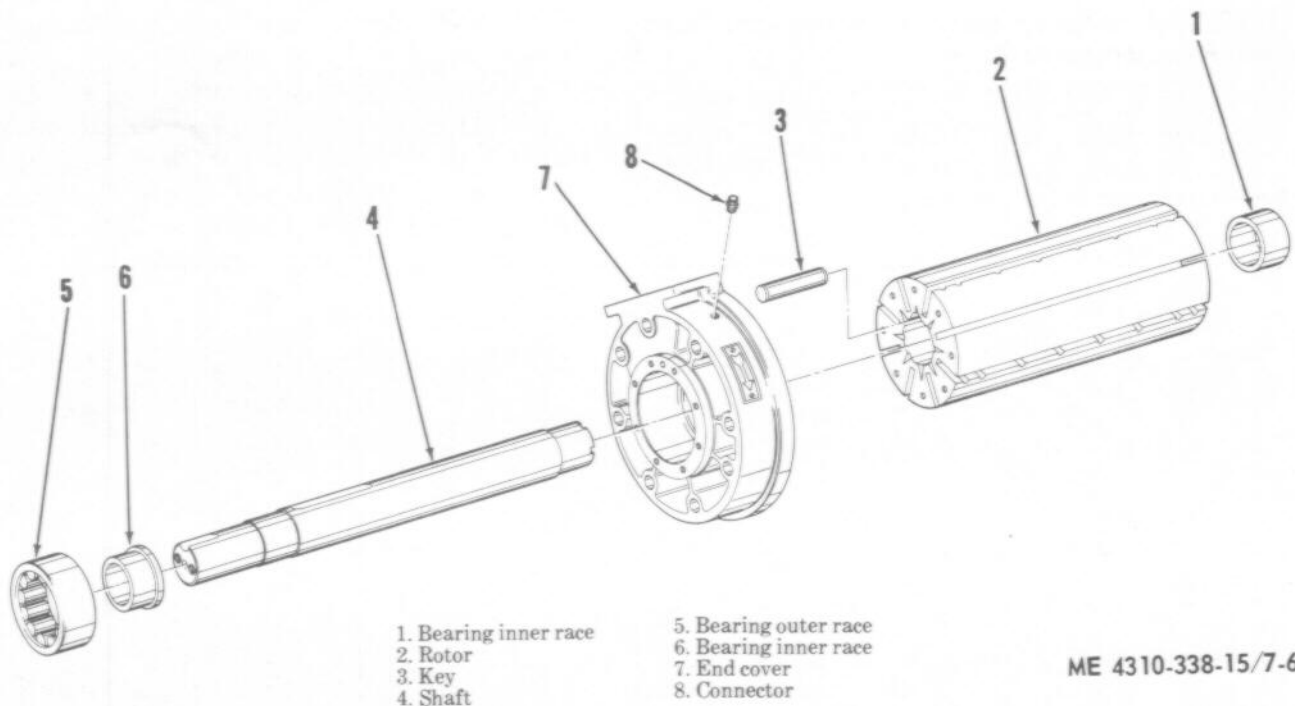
Drive end cover-rotor; disassembly and reassembly.
